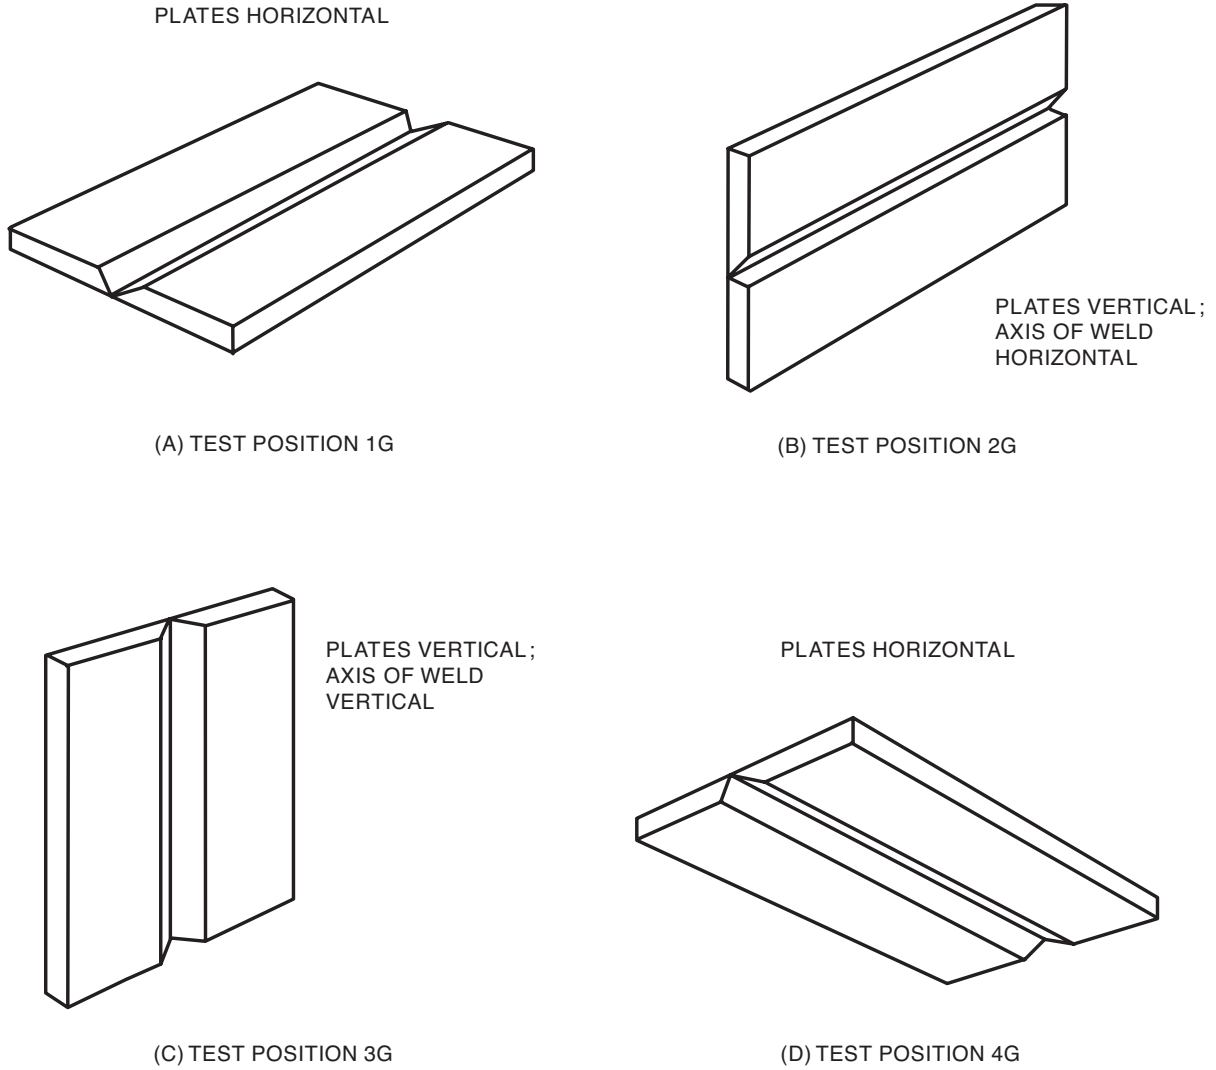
Positions of Test Plates for Groove Welds (see 7.8.2)
